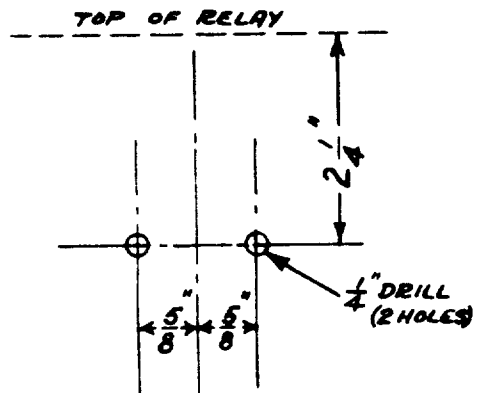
(6077058 [20]) Outline and Panel Drilling for Surface Mounting of HGA17A and HGA17H Relays
